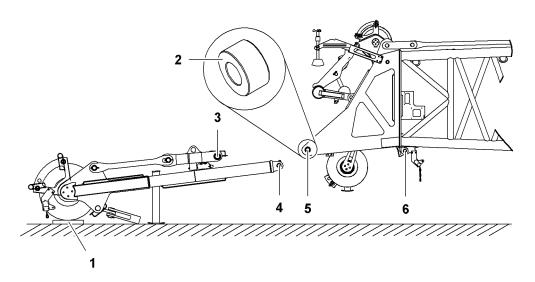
Positioning the auxiliary jib (79300 lb) in front of the boom head section and inserting bushes
